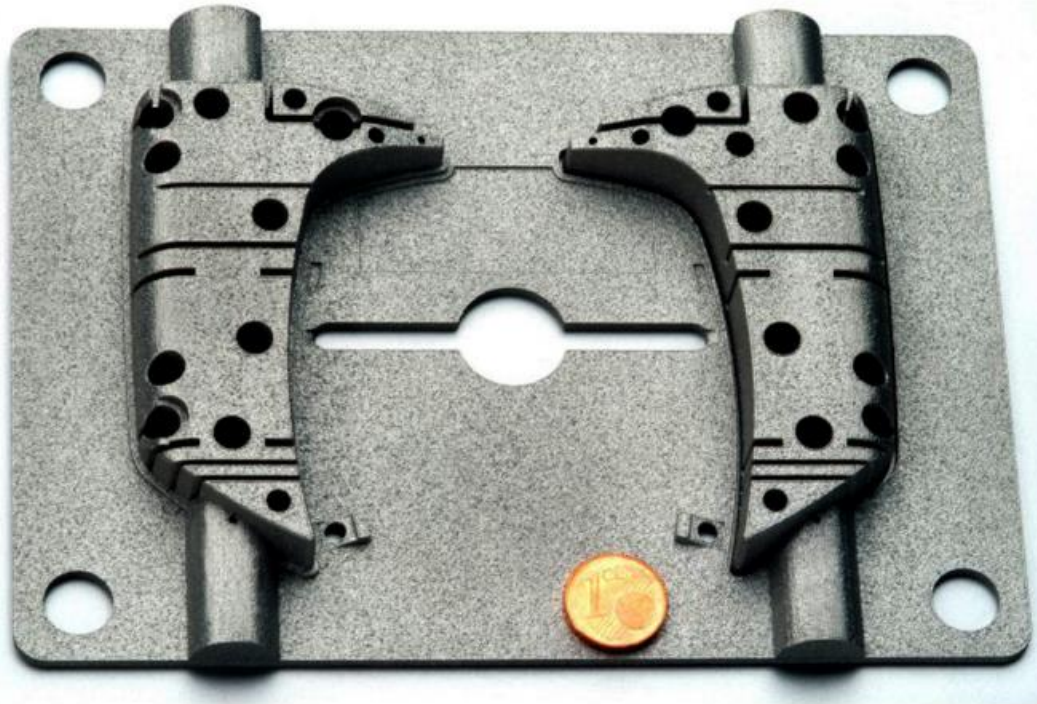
Laser melting, mold insert (Source: MCP-HEK)
